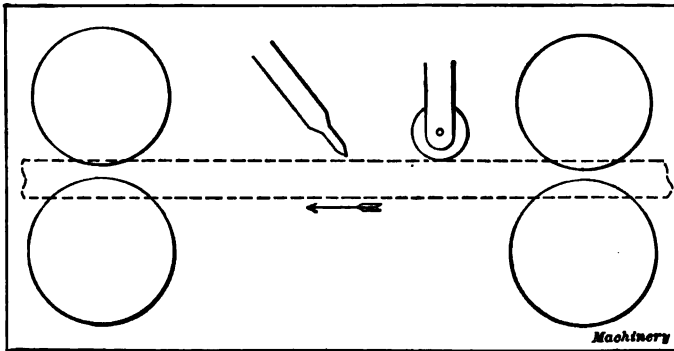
Principle of Autogenous Tube-welding Machine
